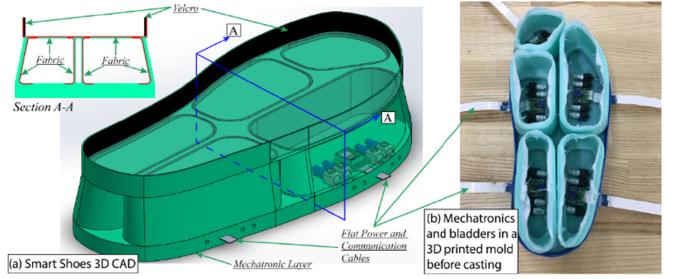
(a) Smart Shoe 3D CAD and cross-sectional view highlighting SS bladder layout, embedded mechatronics, and fabric reinforcement; (b) Photo of the mechatronics and composite bladders assembled before casting liquid rubber to mold the mechatronic layer at the bottom of SS. Note the white embedded fabric in the bladders extends out and is ready to be molded into the top layer.
